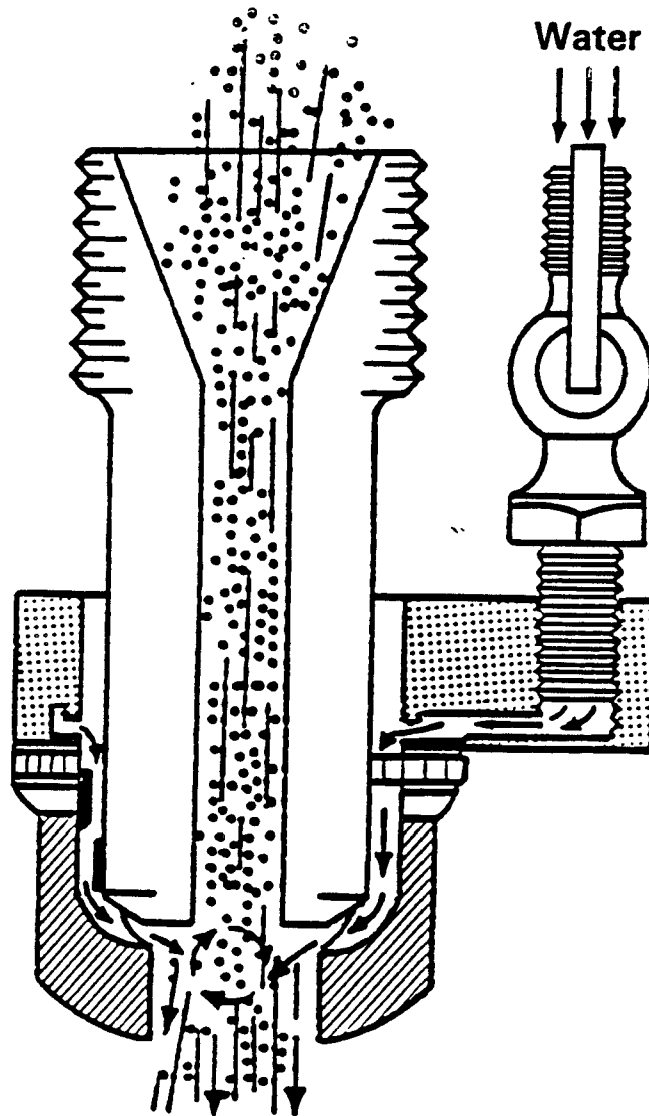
Adapter nozzle converting a dry blasting unit to a wet blasting unit.¹³
